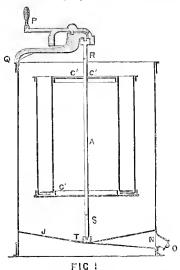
gives a vertical section of the extractor, and fig. 2 is a horizontal section through the comb baskets.
